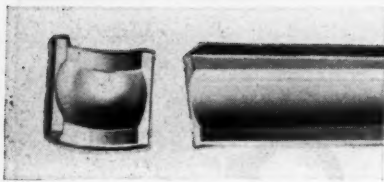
Left — Clever utilization of special-shape bar involves press-forming of blank after cutoff to semi-circular shape
